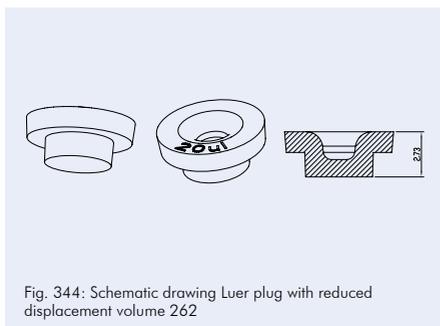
Schematic drawing Luer plug with reduced displacement volume 262
